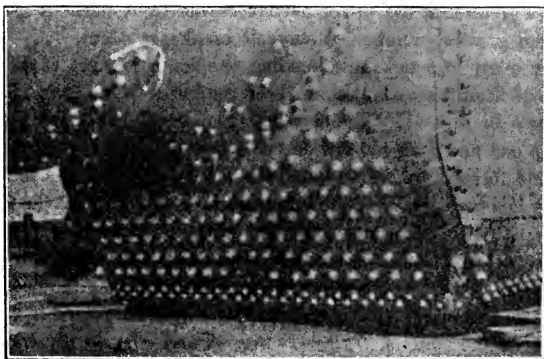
Boiler, Showing Use of Flexible Stay-Bolts.
